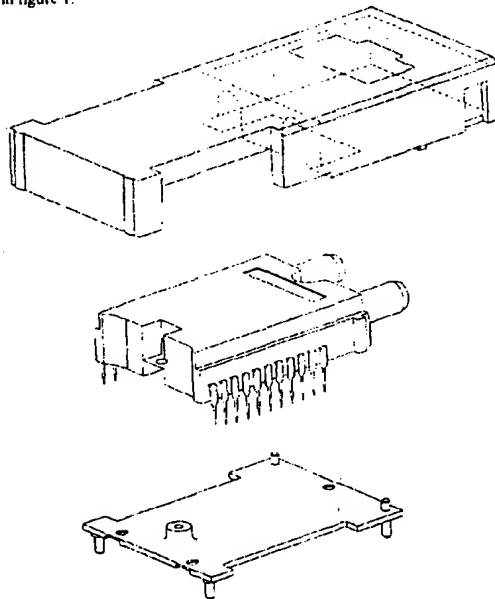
Final Assembly of Low Cost FDDI Transceiver Package
